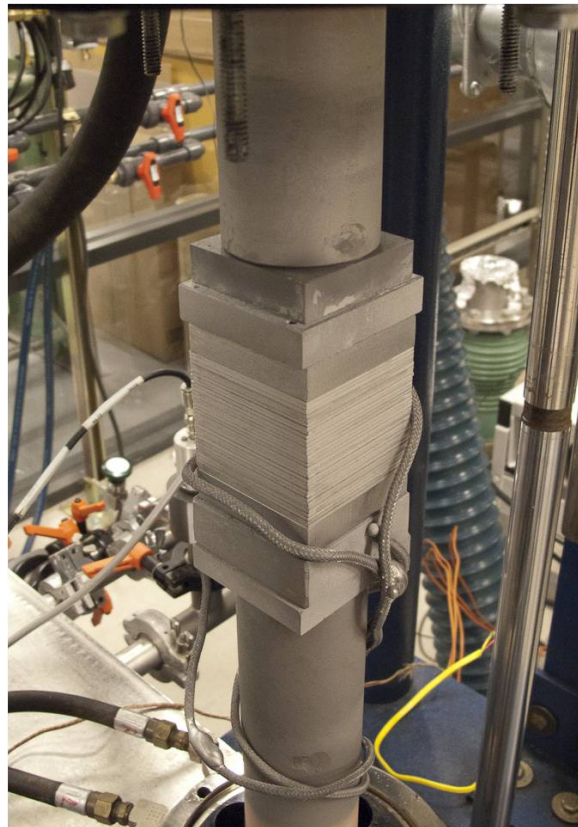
Diffusion weld stack of 800H and end plates before welding.
